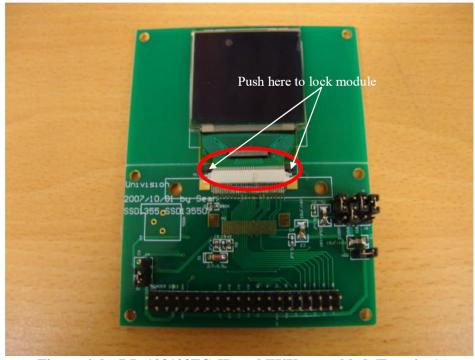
the DD-128128FC-5B and EVK assembled (Top view)
